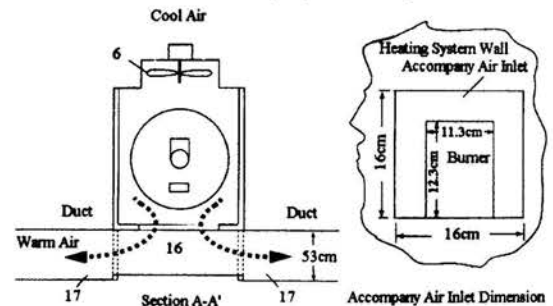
Heating Part of Cool Air and Accompany Air Inlet
